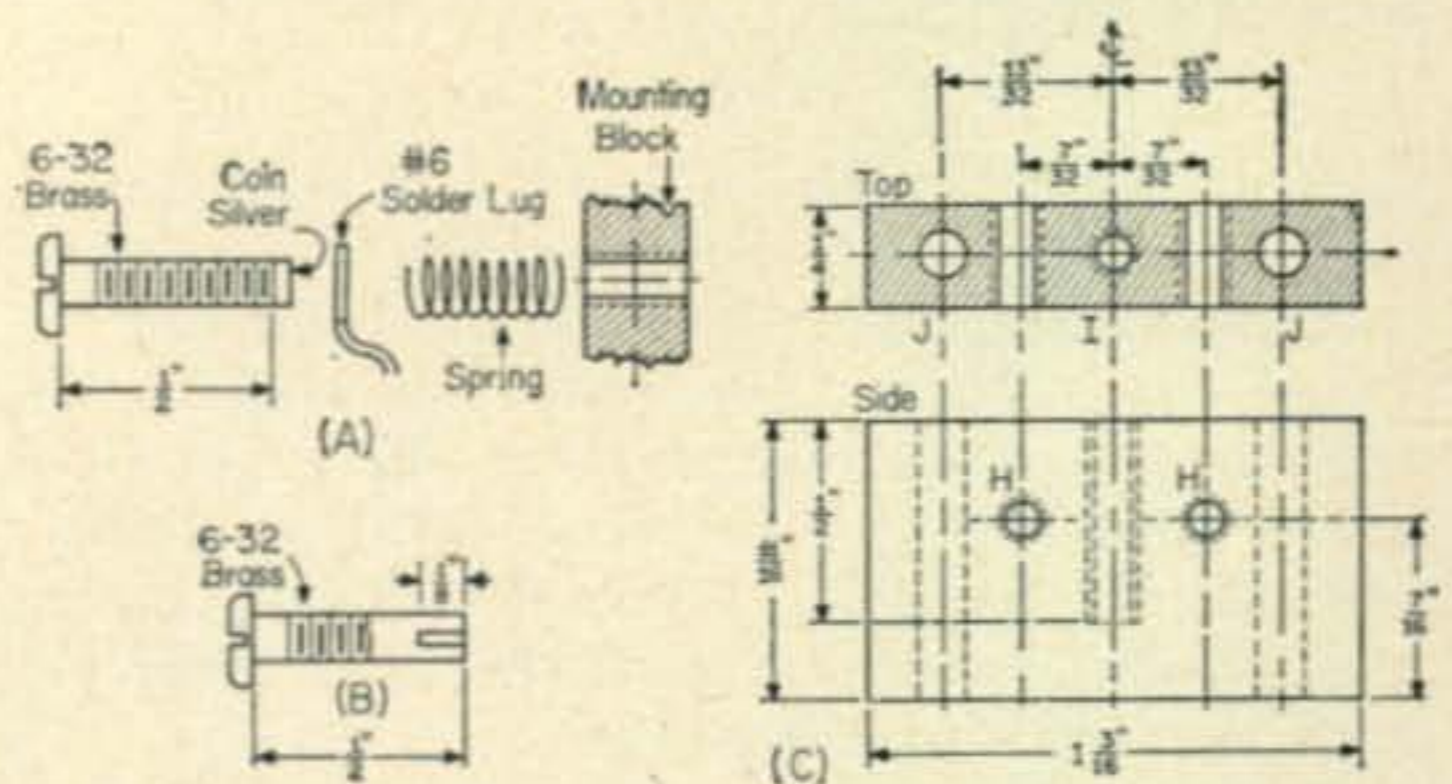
Details of one of the stationary contact assemblies. (A) A compression spring on the brass contact screws maintains sufficient tension to hold contact adjustment. (B) The brass screw for key lever spring tension adjustment is drilled with a #53 drill. (C) Contact mounting blocks is made of lucite or bakelite. Holes H and I are drilled and tapped for 6-32. (Hole I is used on the right block only.) Holes J are 5/32".
